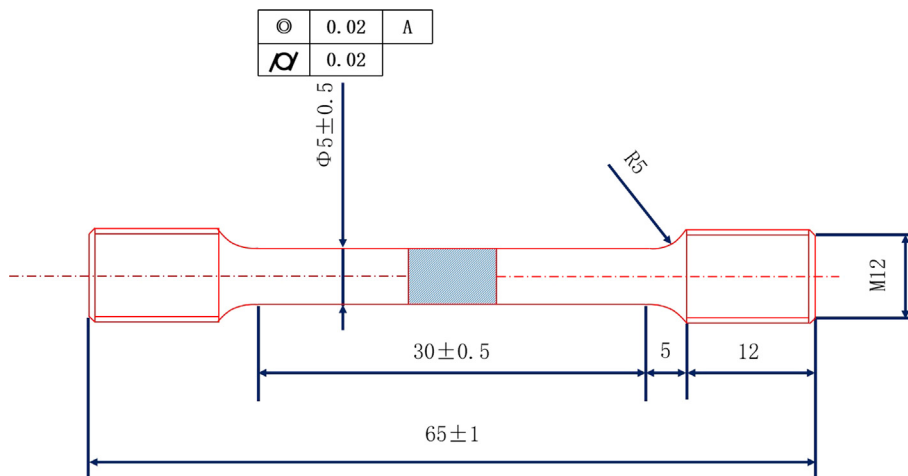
The shape and size of the tensile specimen. Dimensions are in mm.
